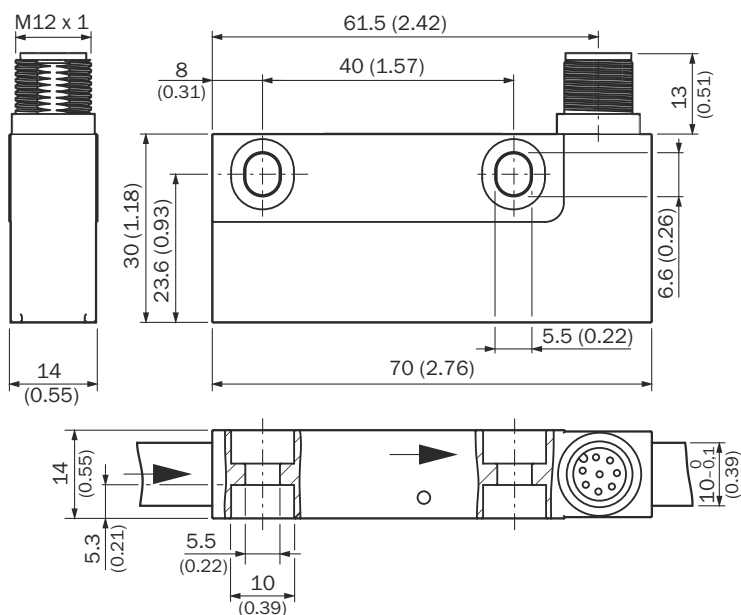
Dimensional drawing TTK70S with M12 male connector (all dimensions in mm)
